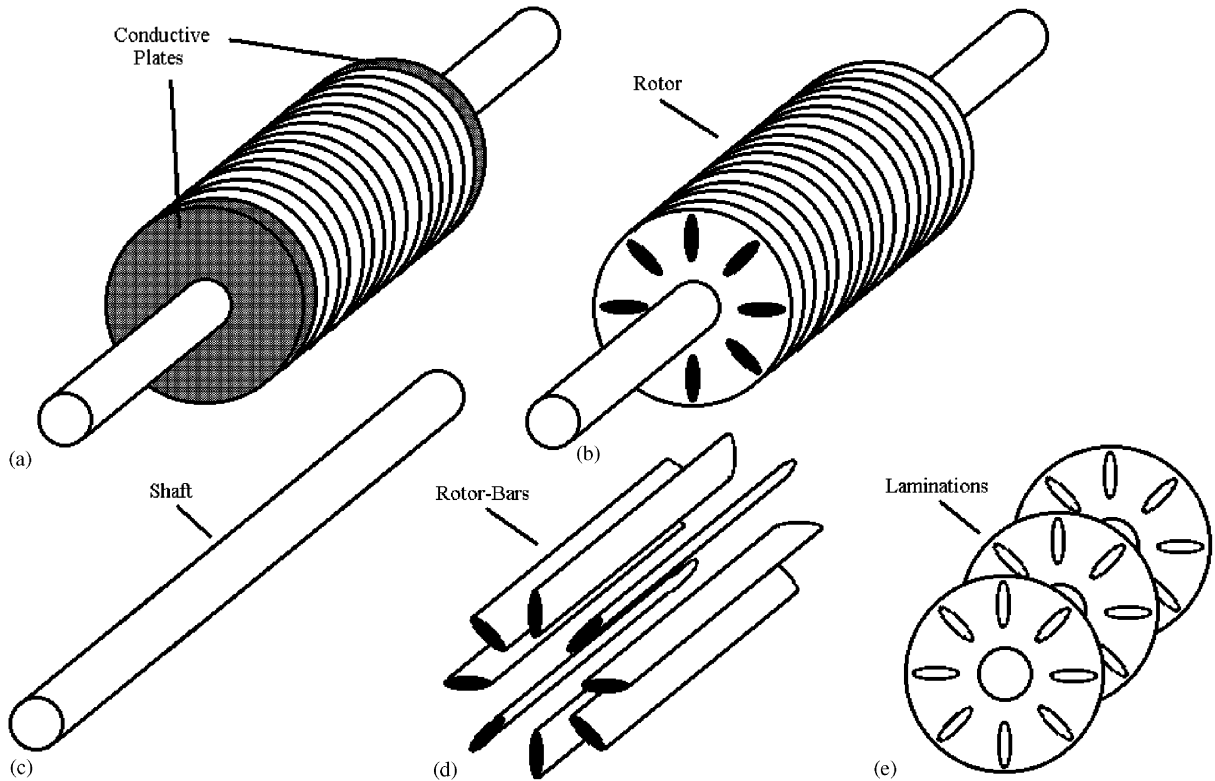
Sketch of the rotor components: (a) rotor assembly, (b) rotor assembly without conductive plates, (c) shaft, (d) rotor-bars, and (e) rotor laminations.
